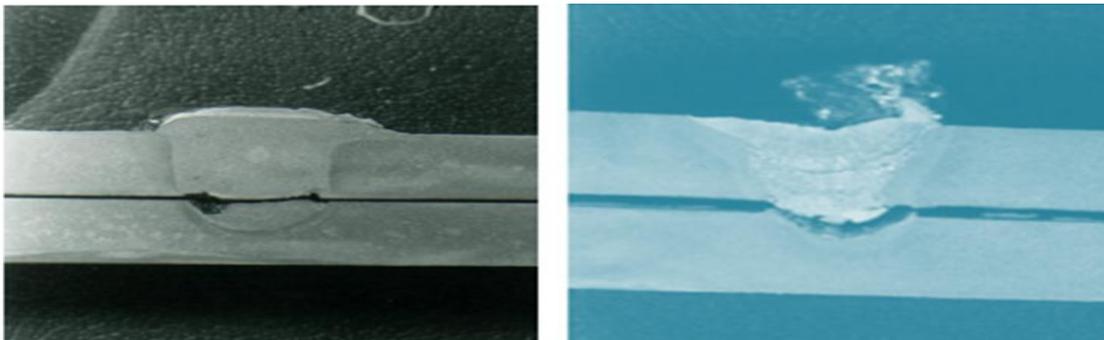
Macro-photograph for welds D1 (left) and W1 (right) conducted by Welder A [11].
